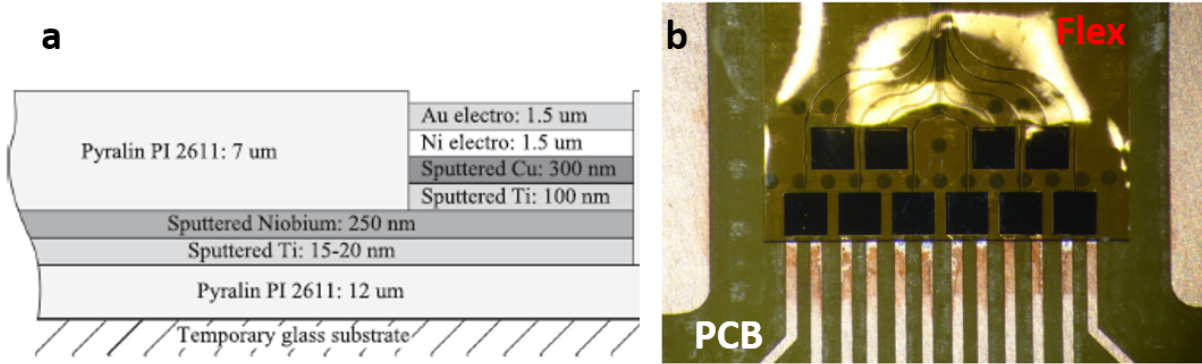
(a) Cross-section of a Nb DC flex cable (b) top-view of the Nb flex cable mounted onto a PCB. Adapted from [24].
